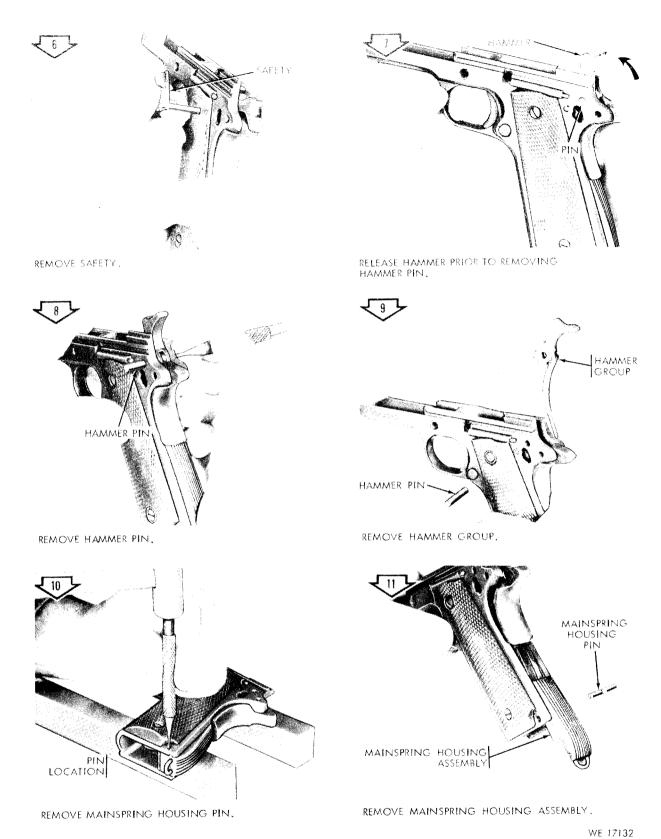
Organizational disassembly/assembly fo Caliber .45 Automati Pistol, M 1911A1. (2 of 6)
